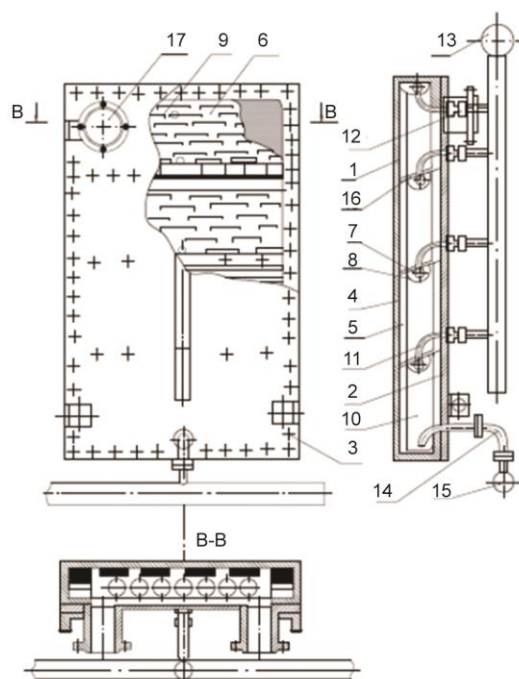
The scheme for cooling the caisson with a porous system with stiffening plates: 1 – housing, 2 – cover, 3 – bolt, 4 – wall, 5 – capillary-porous structure, 6 – plate, 7 – artery, 8 – basket, 9 – opening, 10 – channel, 11, 17 – branch pipe, 12 – pipe, 13, 15 – collector, 14 – siphon, 16 – stiffening plates
